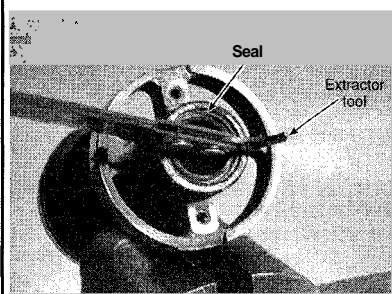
Seal design and positioning vary, so note the type and location, before removing the seal(s) from the housing
